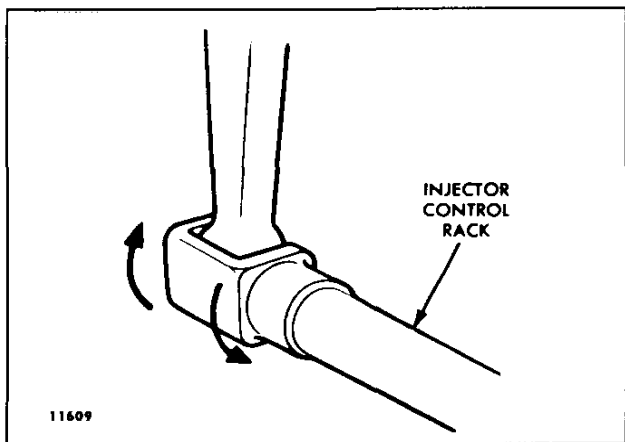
Checking Rotating Movement of Injector Control Rack
